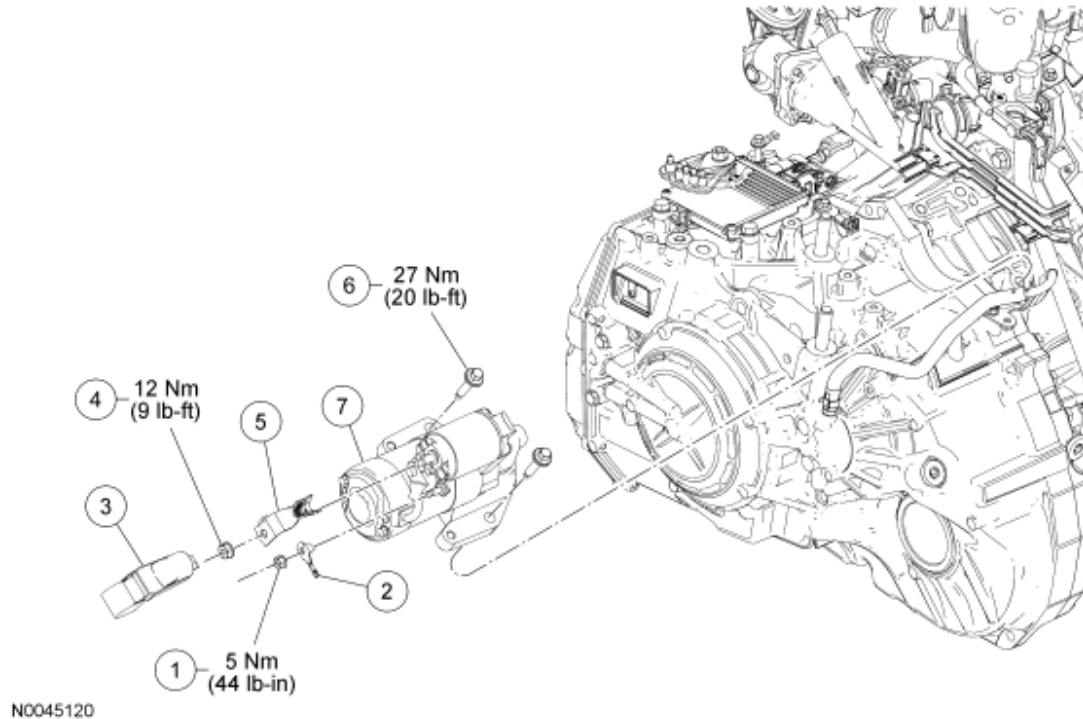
Exploded View Of Starter Motor With Torque Specifications - 3.0L
